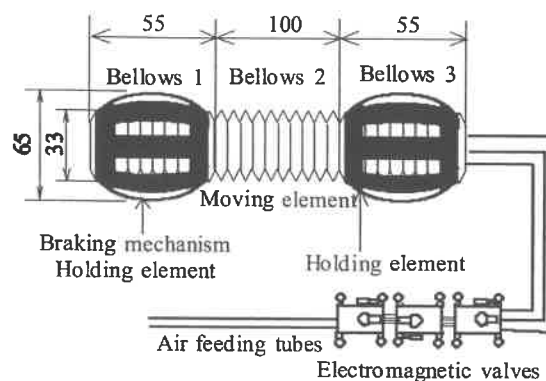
Structure of the fabricated mobile robot movable in different diameter pipes
